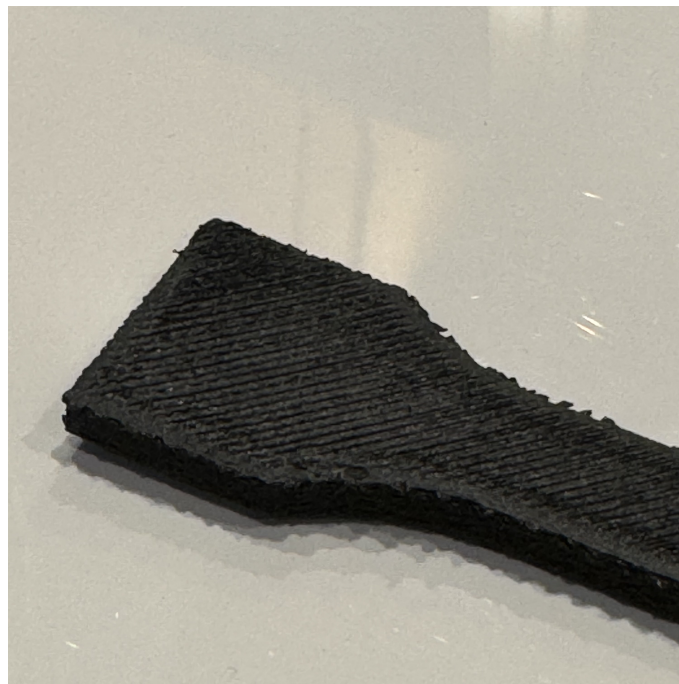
Surface of a 3D printed test specimen in PATH-CF.
